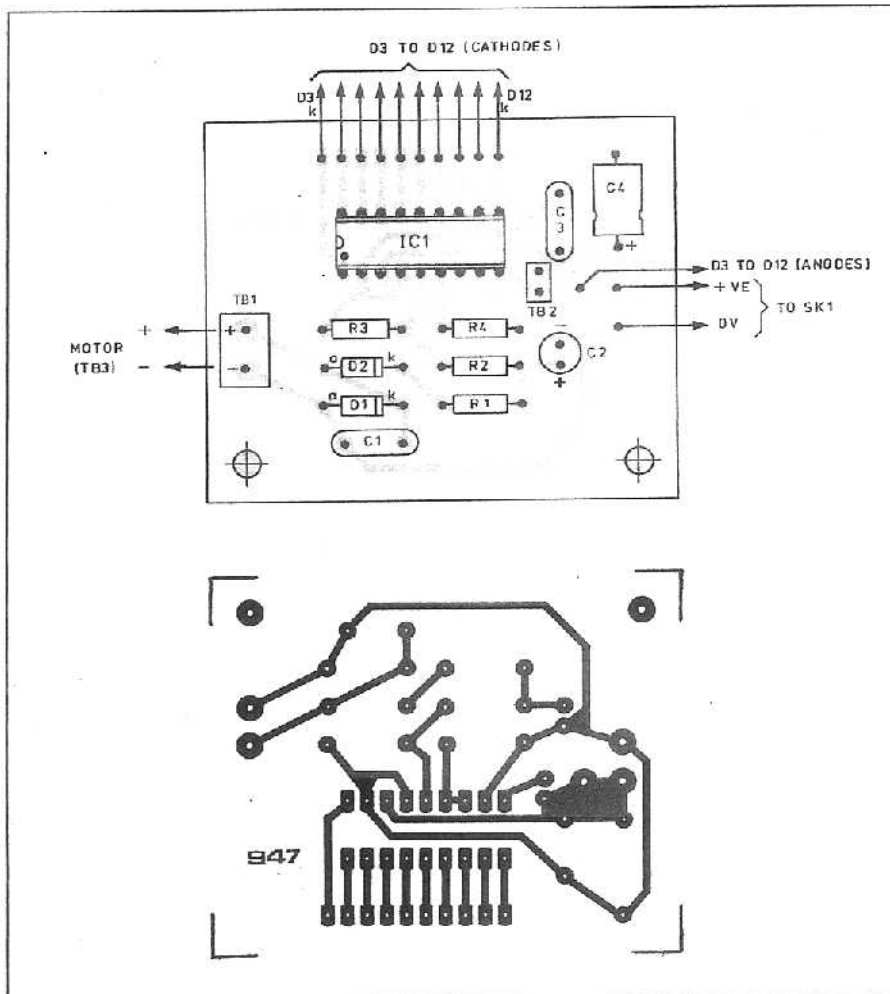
Component layout and full size copper foil track master for the Windicator printed circuit board.
